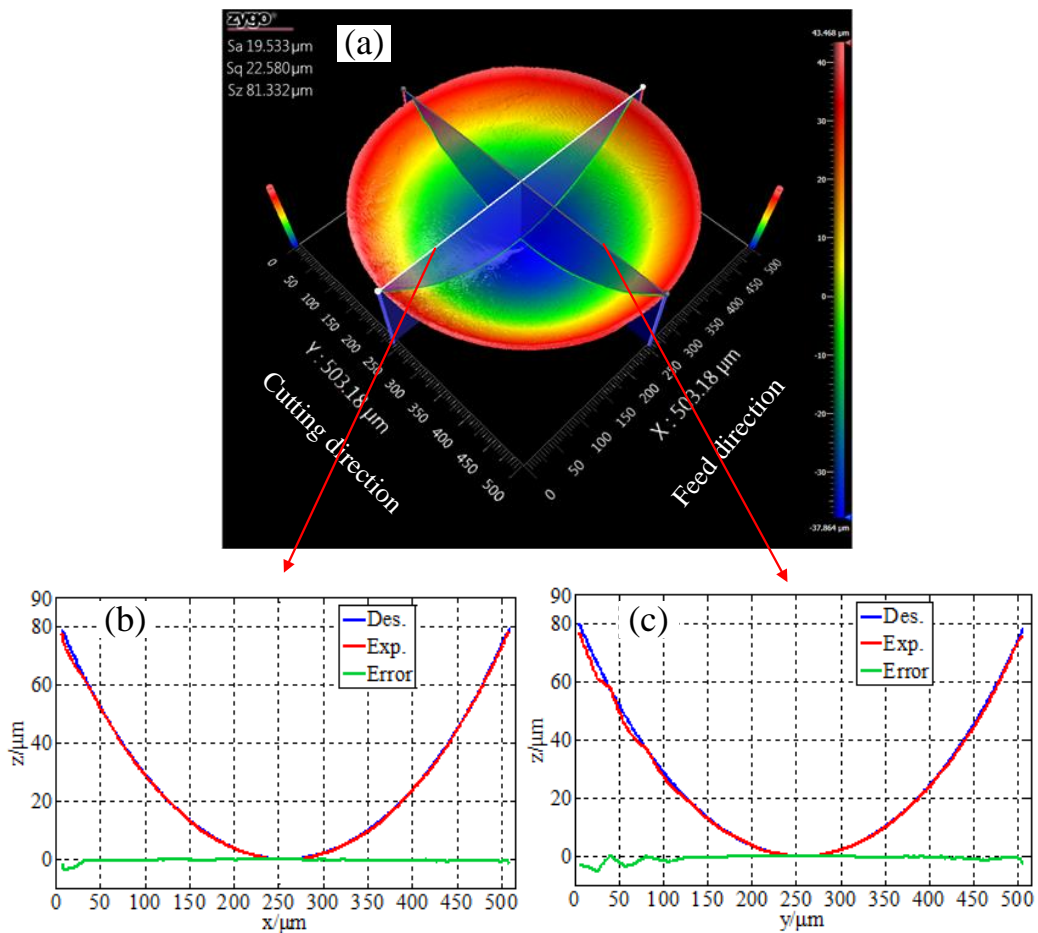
(a) topography of machined lenslet, (b) profile in feed direction, (c) profile in cutting direction
